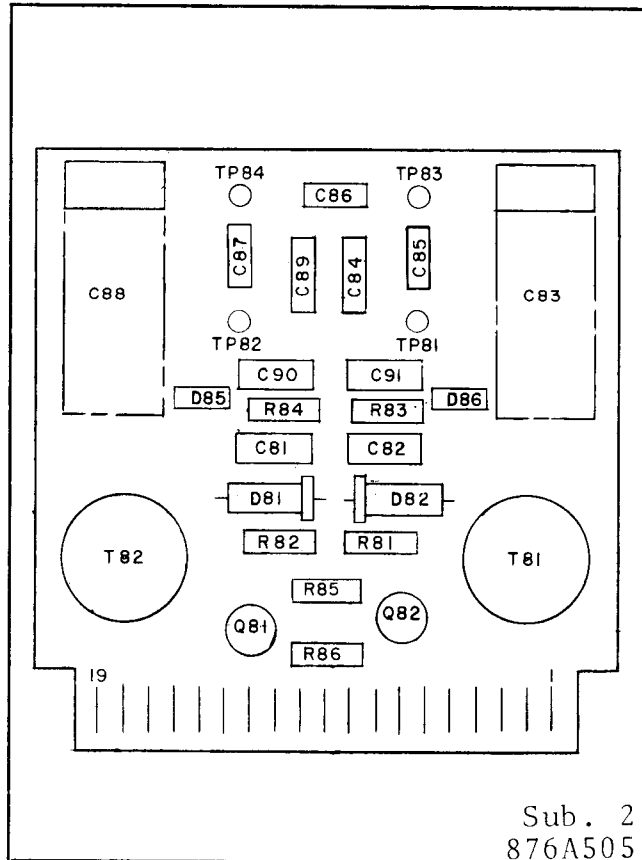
Component locations on the oscillator and mixer printed circuit board.
